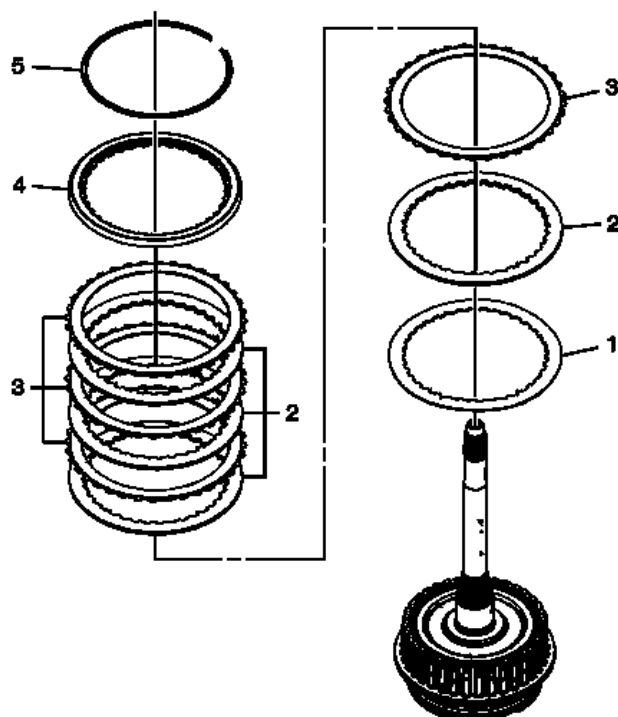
Identifying 3-5 Reverse Clutch Plates
